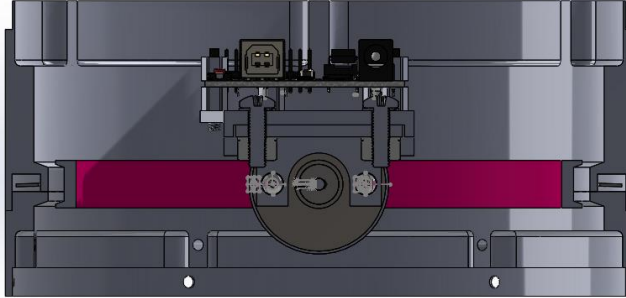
A- A cutaway view of the NSR assembly including coupling rings and wave spring.
